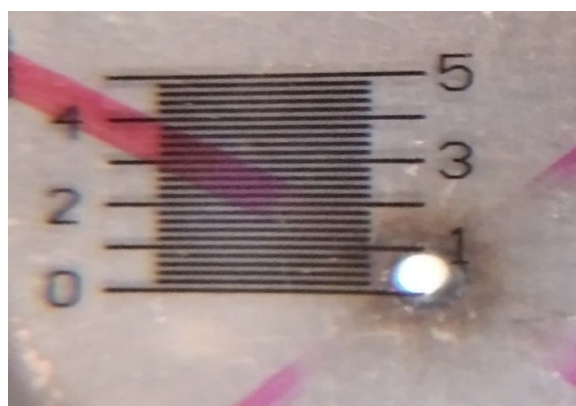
Method of measuring the width of the spot weld using a scale
